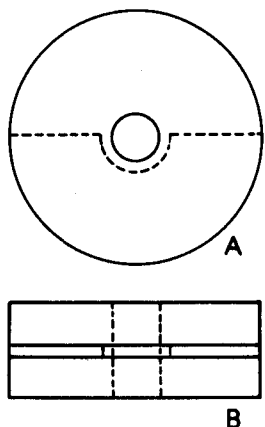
Schematic drawing of tablet die, showing top (A) and side (B) views.
